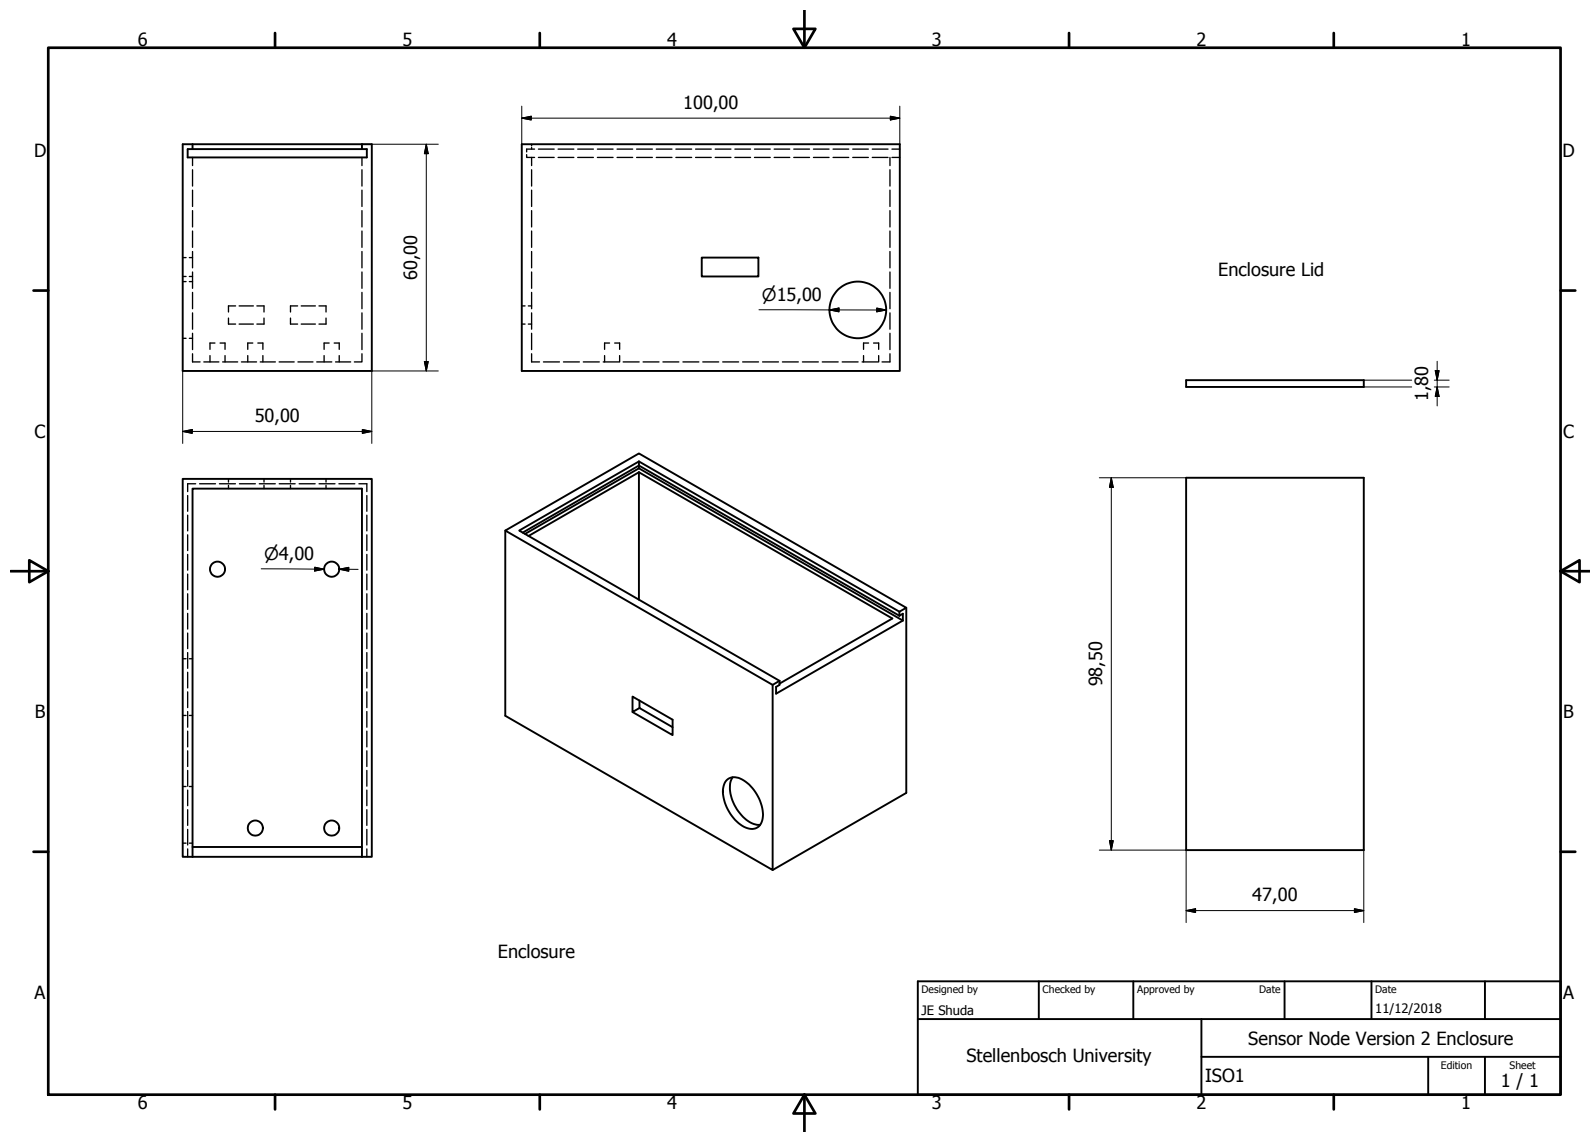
Sensor Node Version 2 Enclosure Design Drawing
